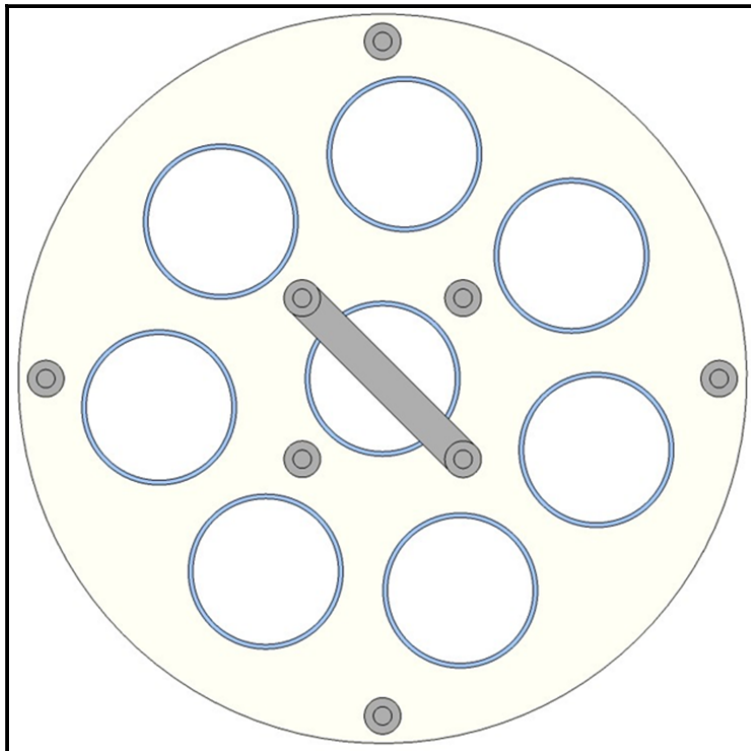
Top view of cartridge showing placement of aluminum rod handle.
